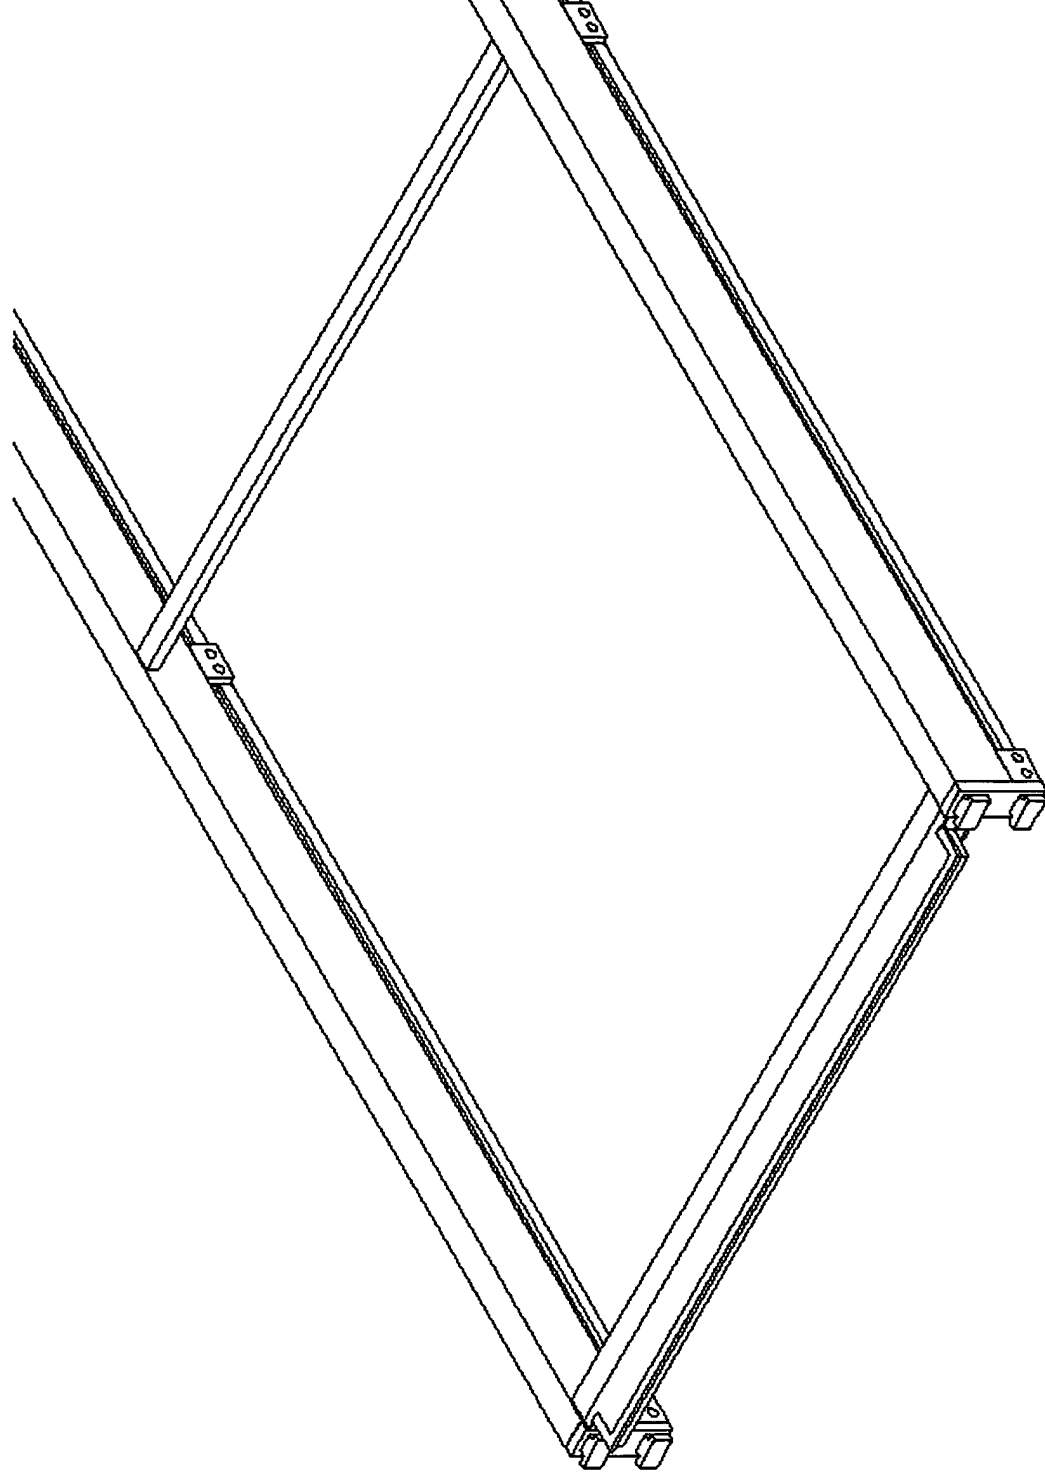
C: Isometric view of the right end of a ceiling frame (20 foot collapsible cargo container)
